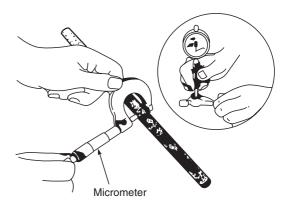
Measuring Rocker Arm ID and Shaft
